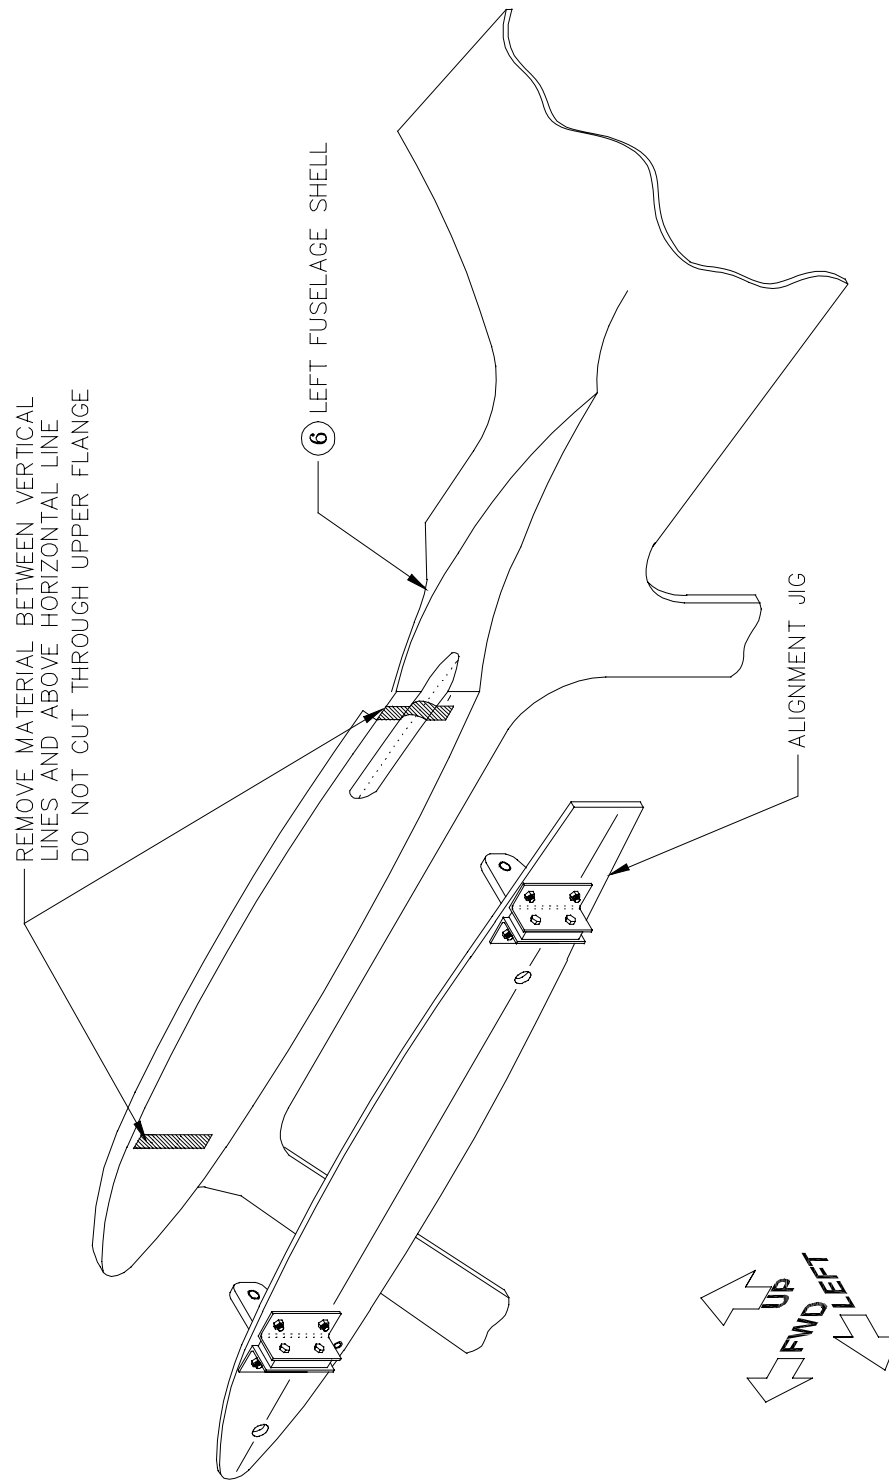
Mounting the Fuselage Shell Alignment Jig on the Shell
